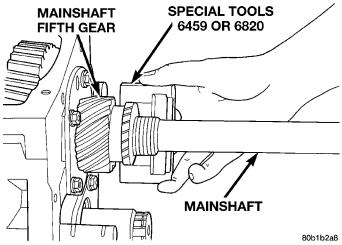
Installing First Jaw On Mainshaft Fifth Gear
